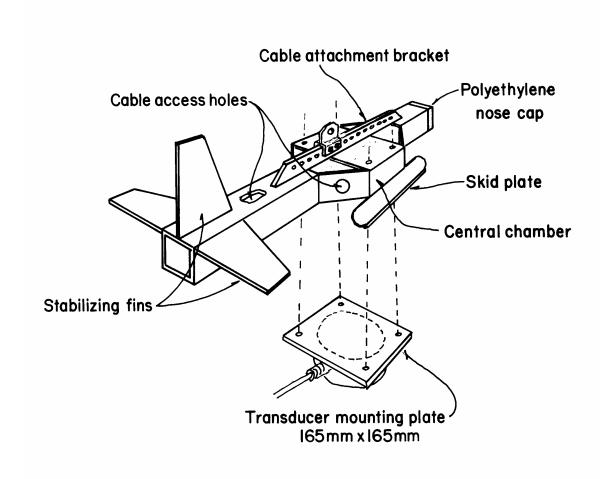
Three-dimensional view of the single transducer towed body, showing a transducer mounting plate that bolts up into the central chamber.
